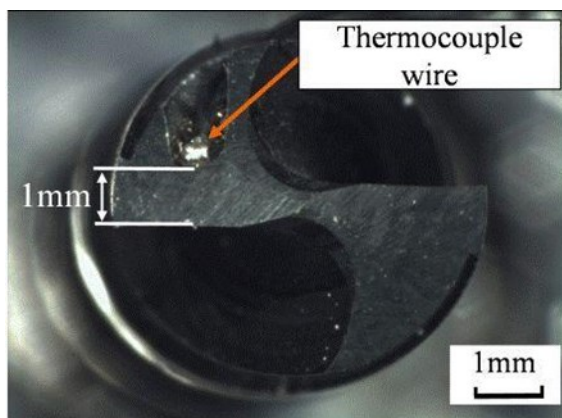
The drill embedded K-type thermocouple near the cutting edge
